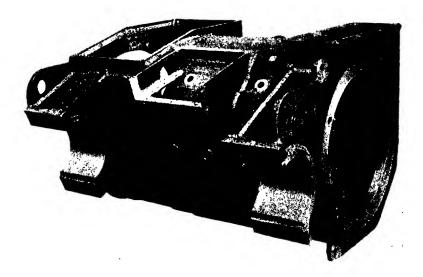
Machined cast-steel frame for nose-suspended motor.
